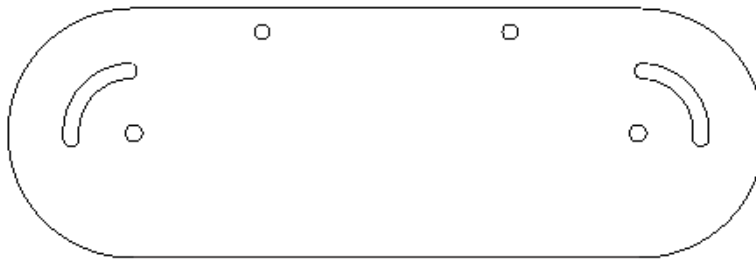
Line Drawing for Custom Folding Wing Hinge.
